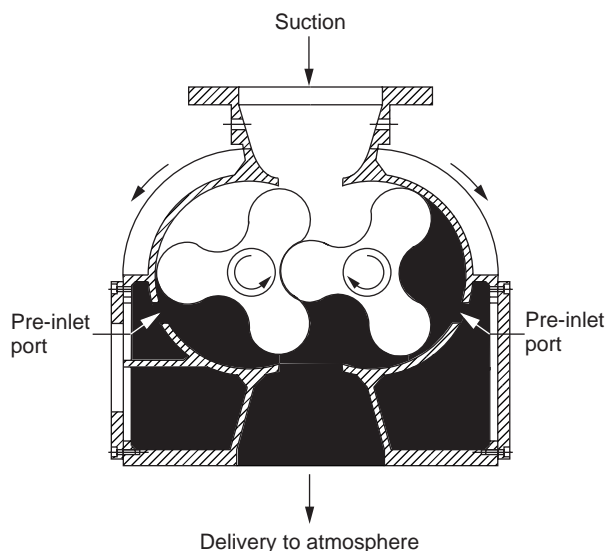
Rotary Lobe Blower (3-Lobe Impeller)
